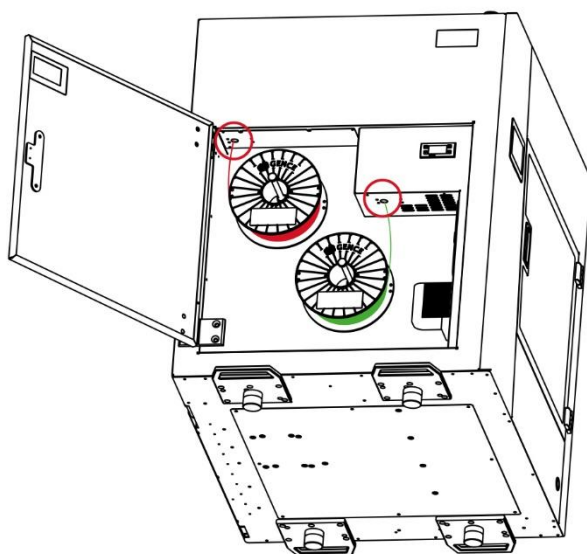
Correct loading of material for Tool 0 and Tool 1
